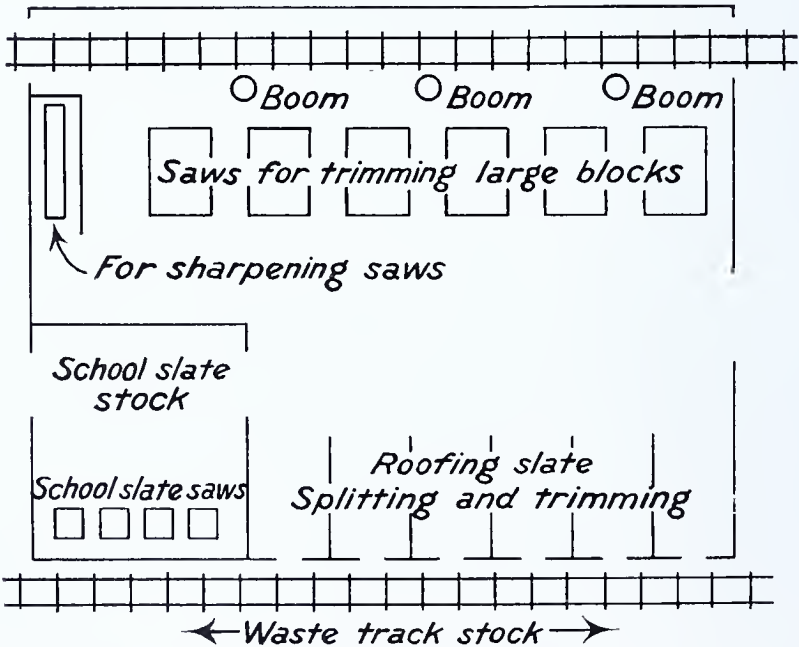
Plan of combination roofing and school slate mill of the Blue Ridge Slate Co., Slatington.
